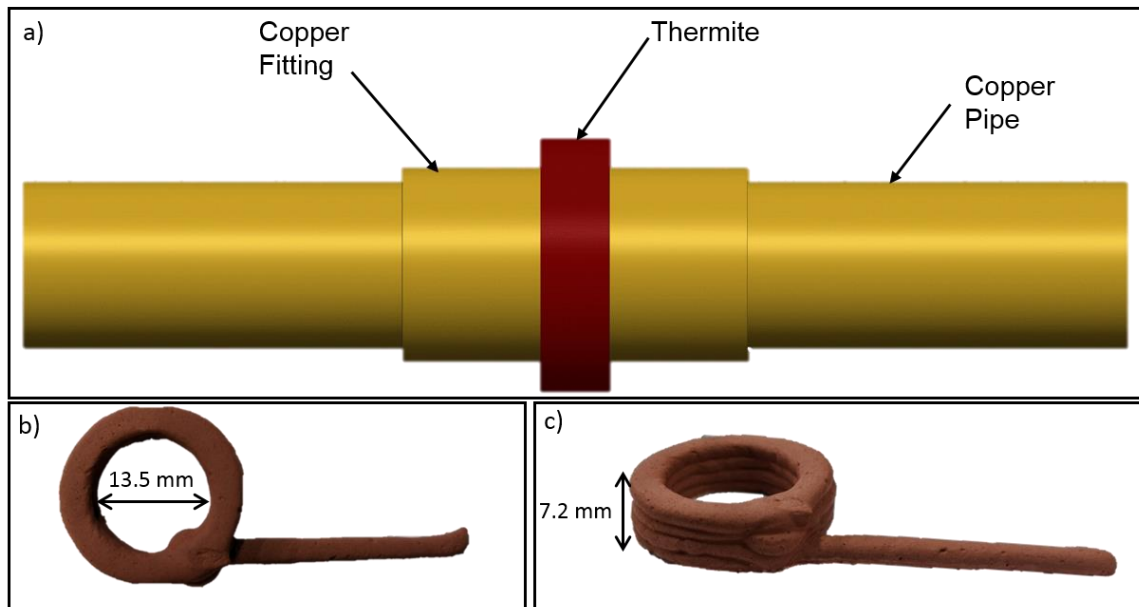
Schematic of joint setup showing the copper fitting over the copper pipe, with the thermite placed over the fitting, b) top view of thermite structure, and c) isometric view of thermite structure
